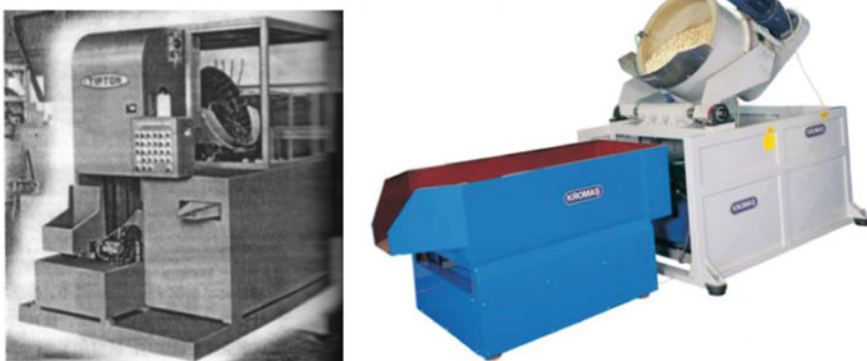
Photographs of whirling barrel finishing equipment. a Small equipment; b full-automatic equipment
